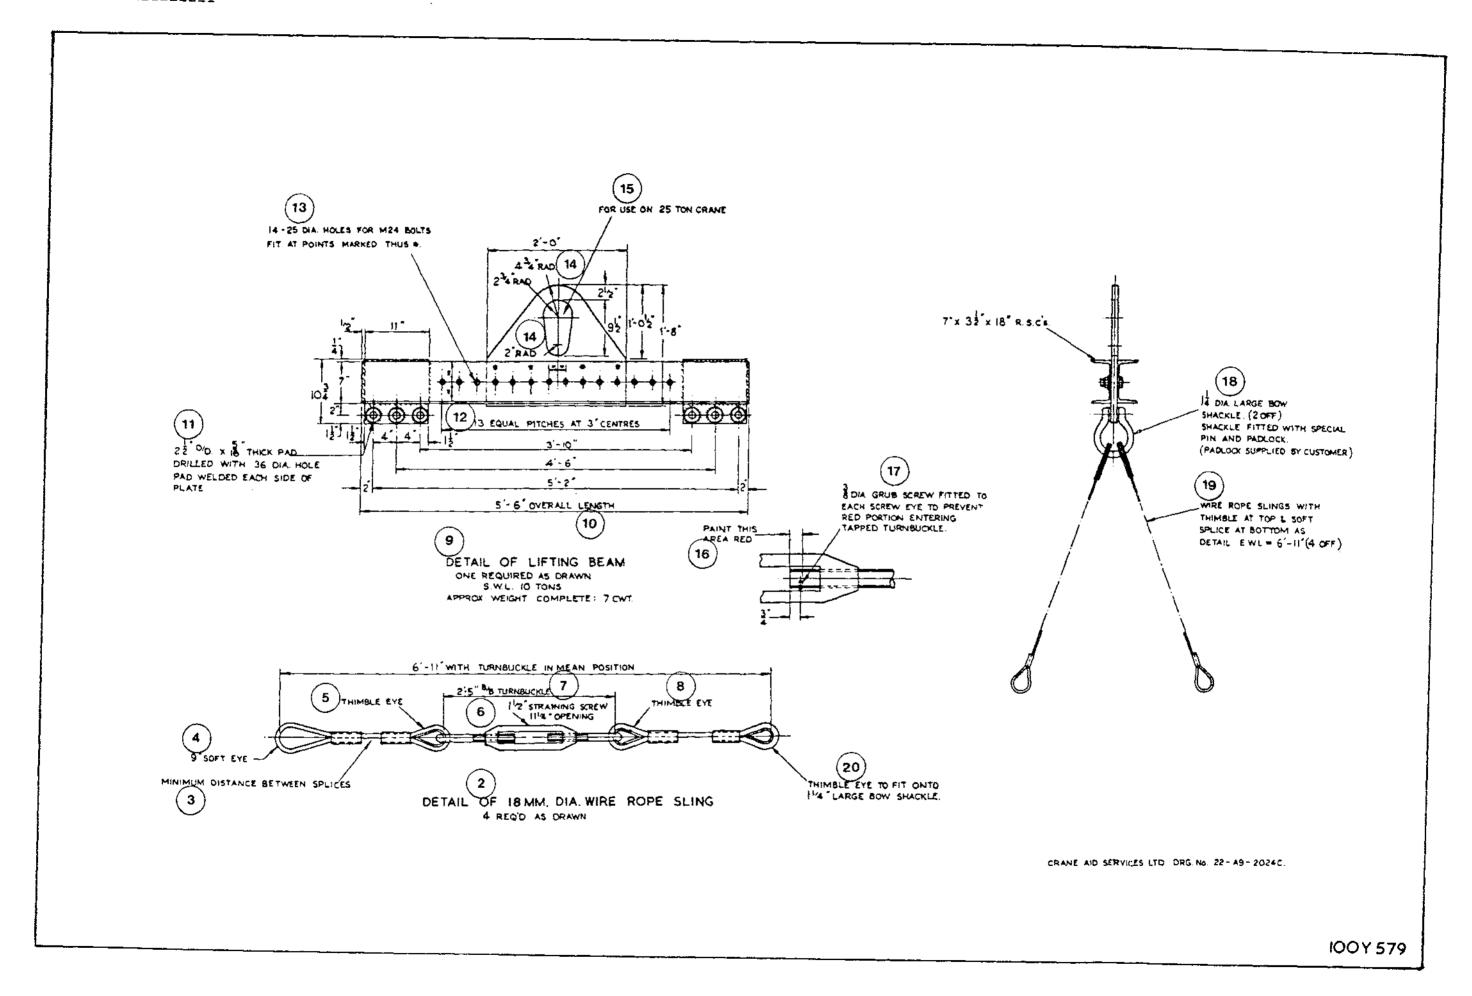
Detail of 10 Ton Lifting Frame Drg.100 Y 579
